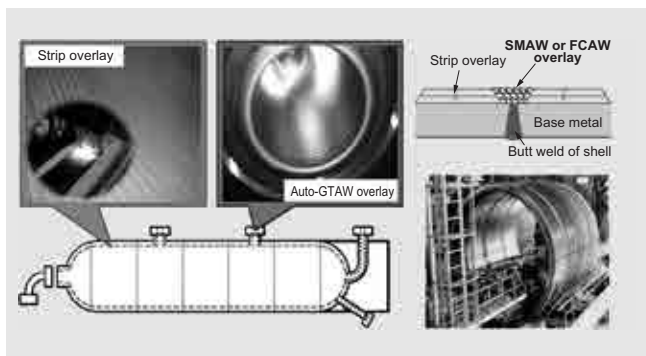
Schematic view of pressure vessel and overlay welding
